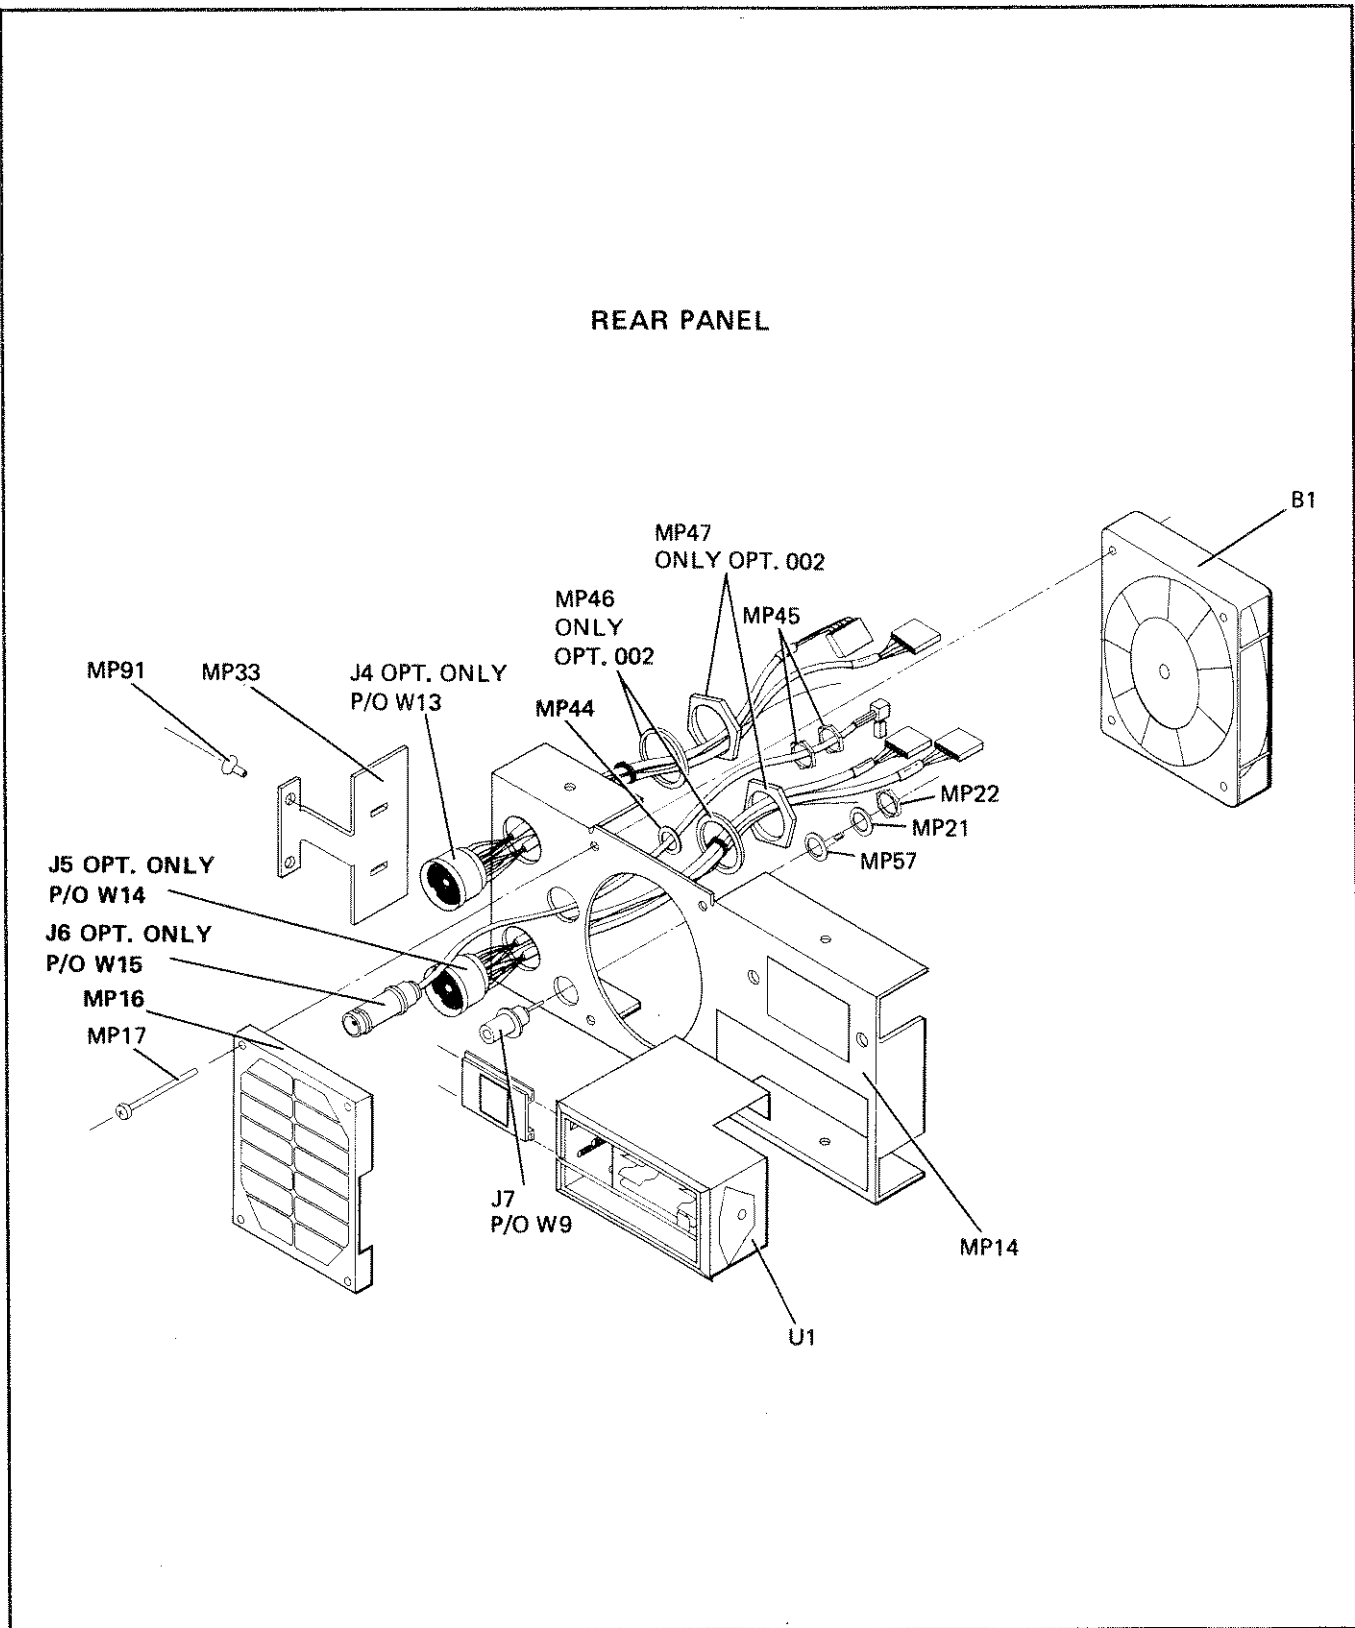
Rear Panel Illustrated Parts Breakdown
